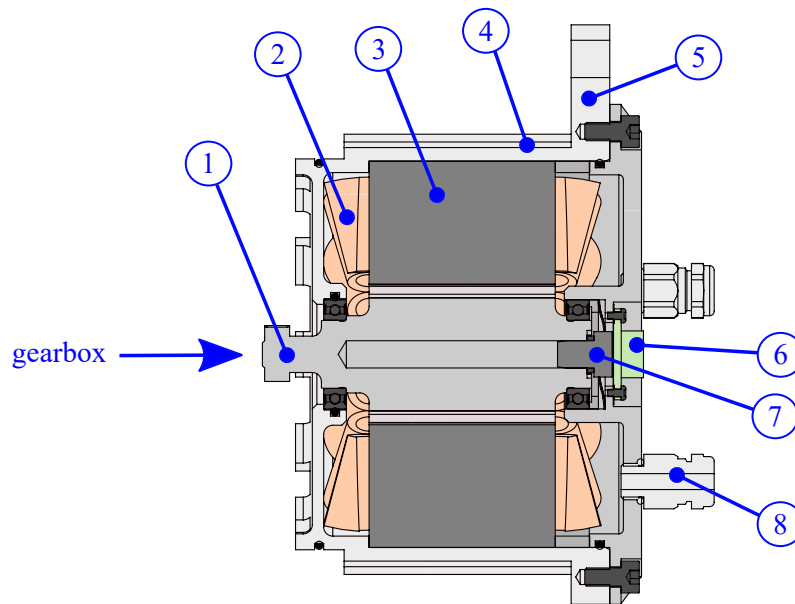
Side cut view of the electric machine assembly. Rotor (1), windings (2), stator (3), motor casing (4), interface with the mounting flange (5), angular position sensor (6), sensor magnet (7), cable gland [$\times 3$] (8).
